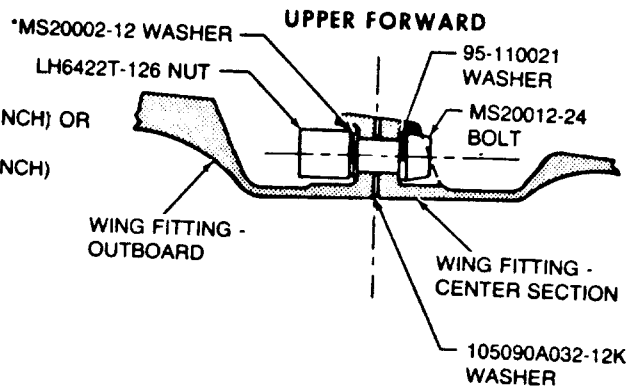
Wing/Fuselage Attachment Piper PA-38-112
